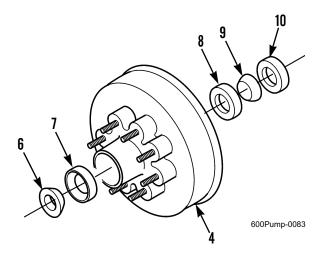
Hub/Drum Seal, Bearings, and Bearing Races.
